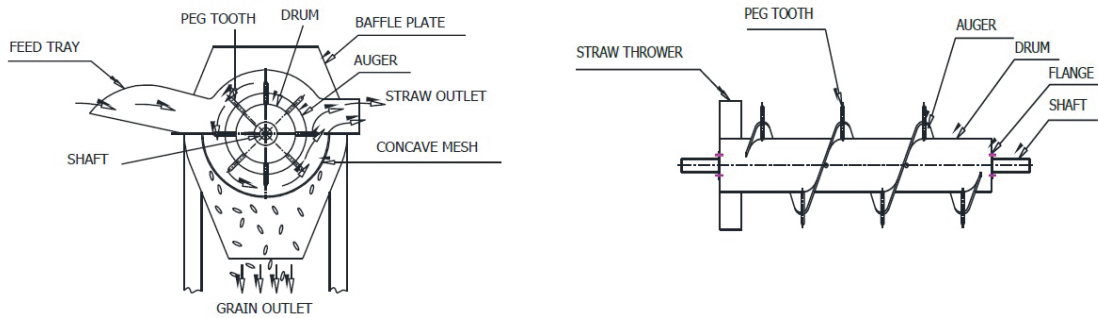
Schematic diagram of rice thresher (left) and peg teeth (right) installed on drum-shaft assembly.
